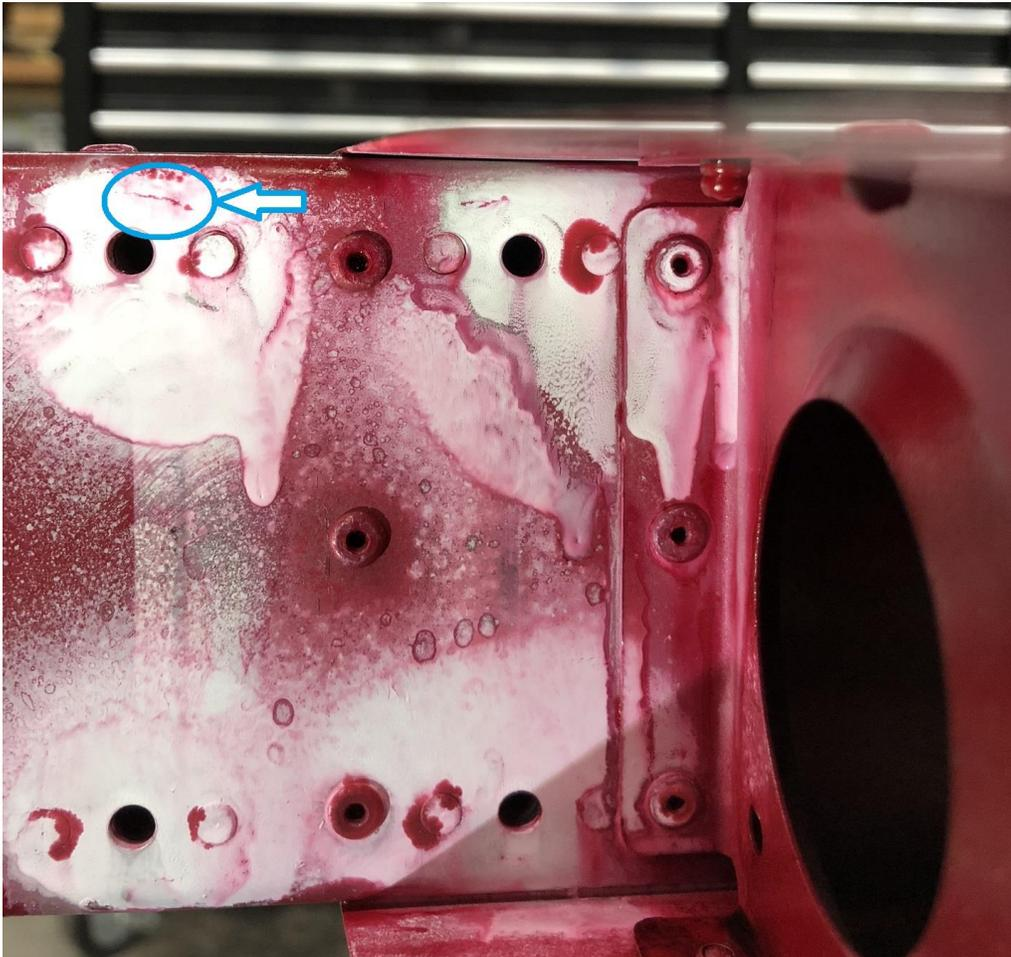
DYE PENETRANT TEST CRACK DETECTION
